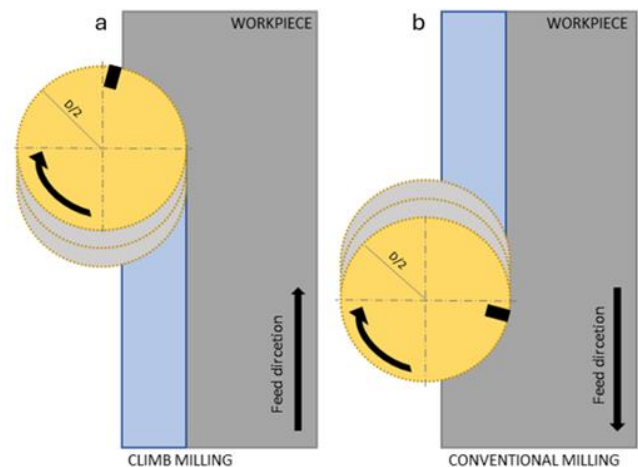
Direction of the cut when using: a – climb milling; b – conventional milling
